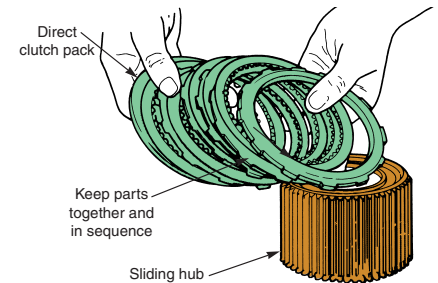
Inspect the clutch plates for wear, burning, scoring, and other damage. Also, check the drum, bushings, hub splines, and thrust washers. Replace parts that show signs of wear or damage. (DaimlerChrysler)
